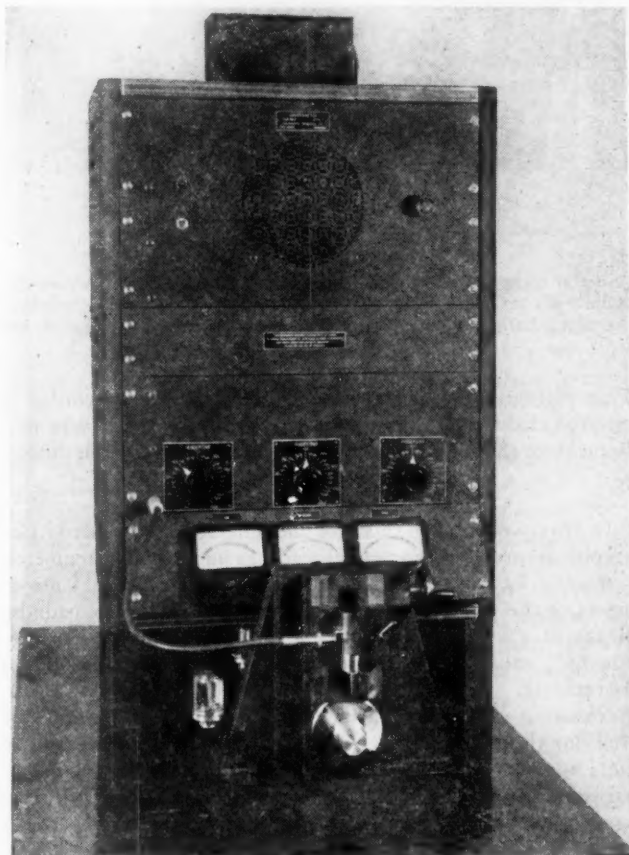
THE ANDEROMETER, AN INSTRUMENT FOR PRODUCTION-CHECKING OF COMPLETED BALL BEARINGS
